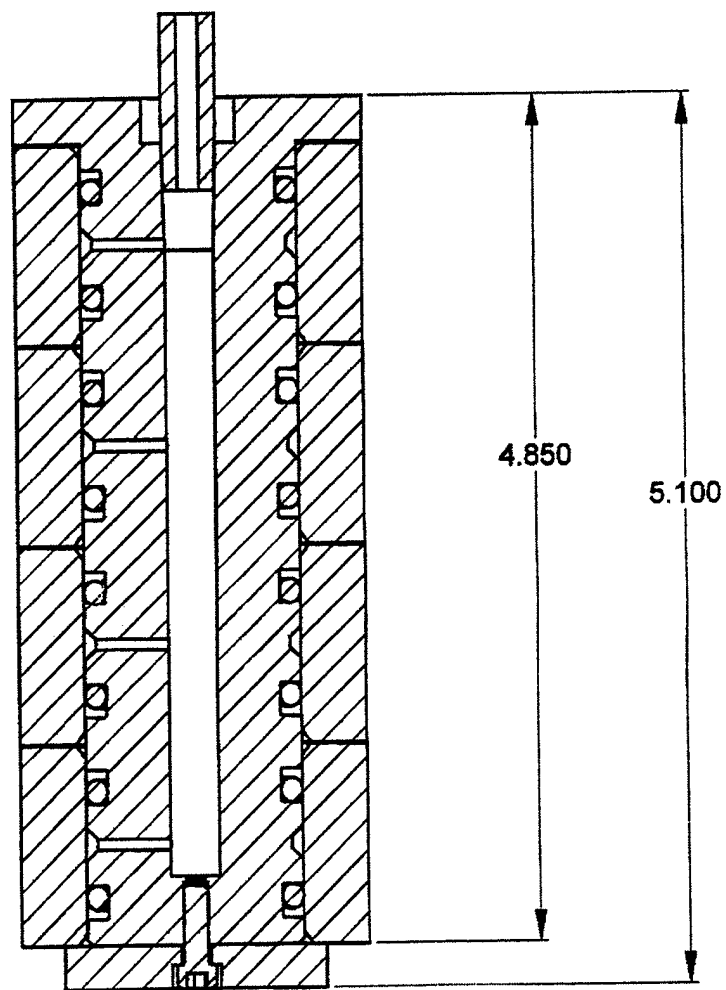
Test Fixture for Aging of O-Ring Seals
